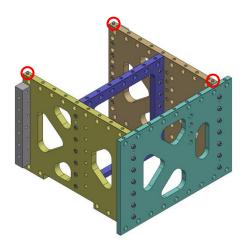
Dowel pins pressed into bottom of Boxwork Assembly. After this step, the Boxworks are ready for installation in Stage 1.
